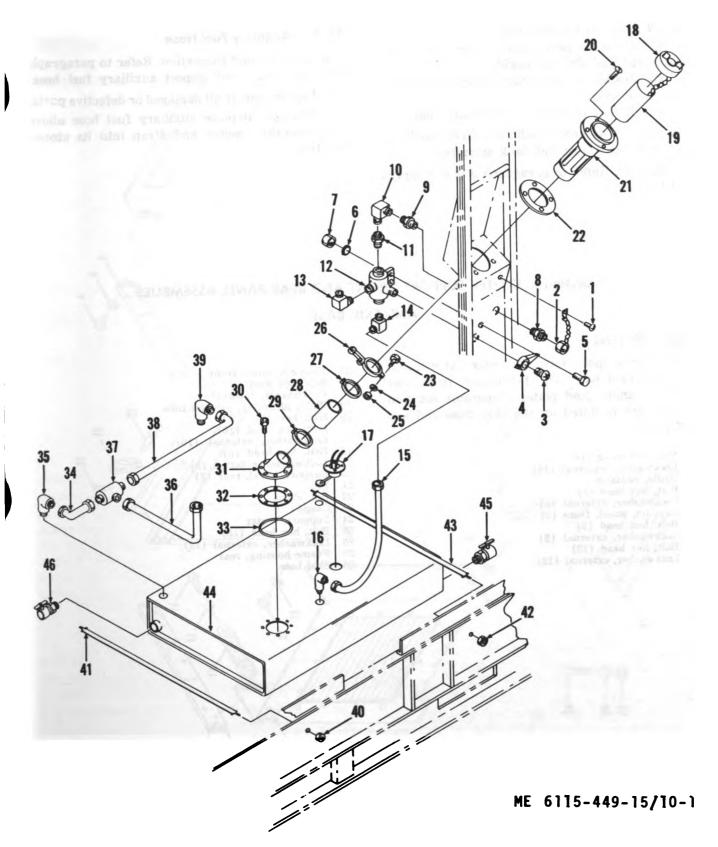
Fuel tank assembly, removal, disassembly, reassembly and installation.
